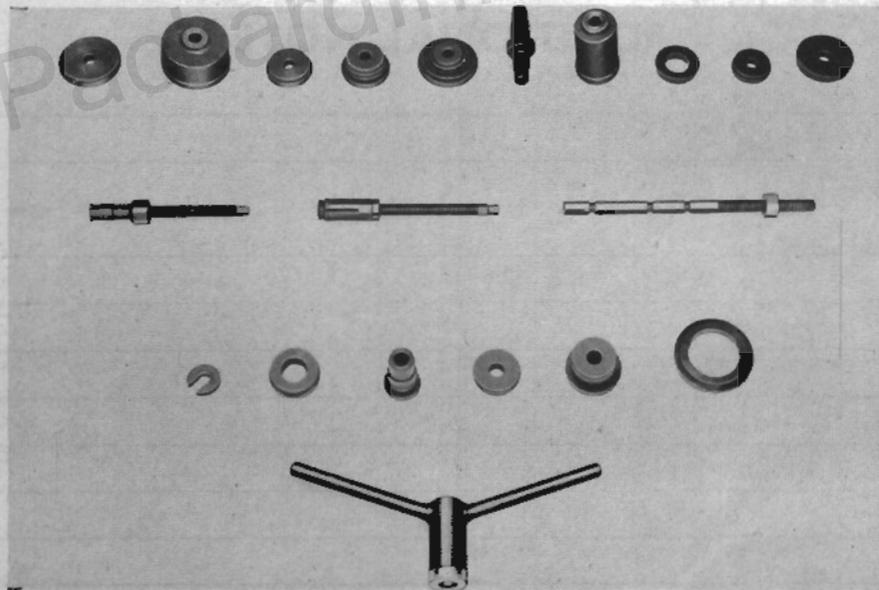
J-5945 BUSHING REMOVER AND REPLACER SET
